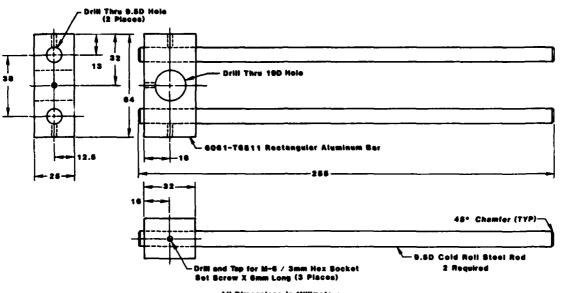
through A-6 are detailed drawings for construction of the chinchilla restraint system.
